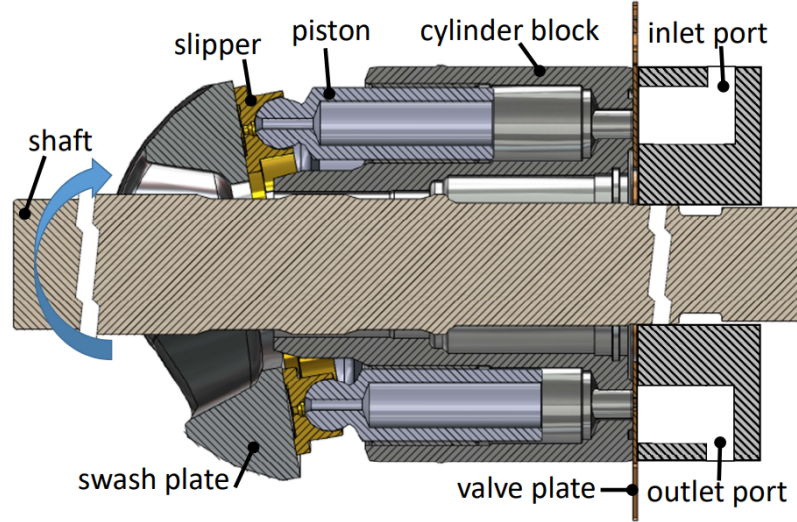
Cross-sectional view of swash plate type axial piston machine (Kalbfleisch 2018)
